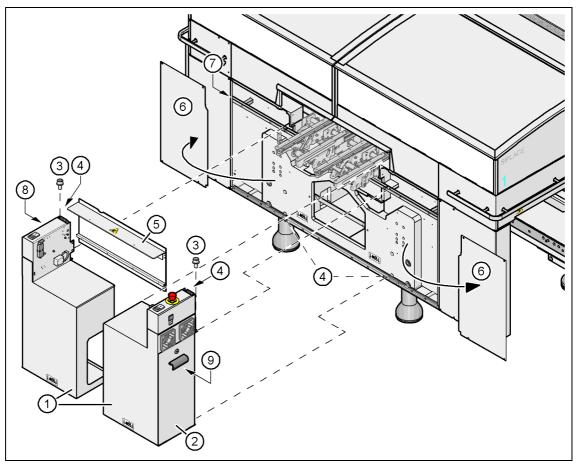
15 Fitting the extension kit on the PCB input side
